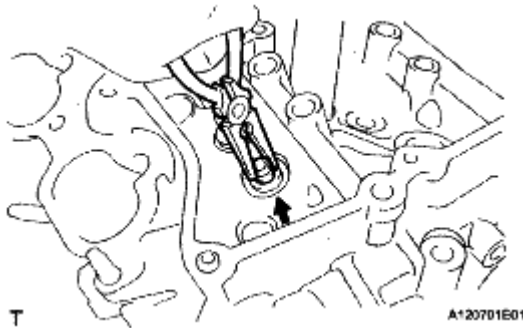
Removing Valve Stem Oil Seal Using Needle-Nose Pliers
